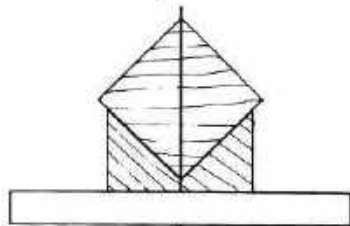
CUTTING DIAGONAL ON A V BLOCK JIG
